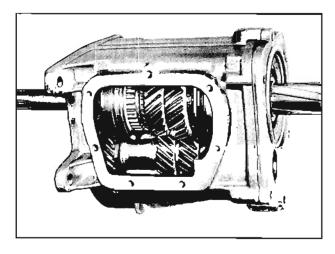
Third and Fourth Speed Synchronizer Clutch Sleeve in Fourth Gear Position
